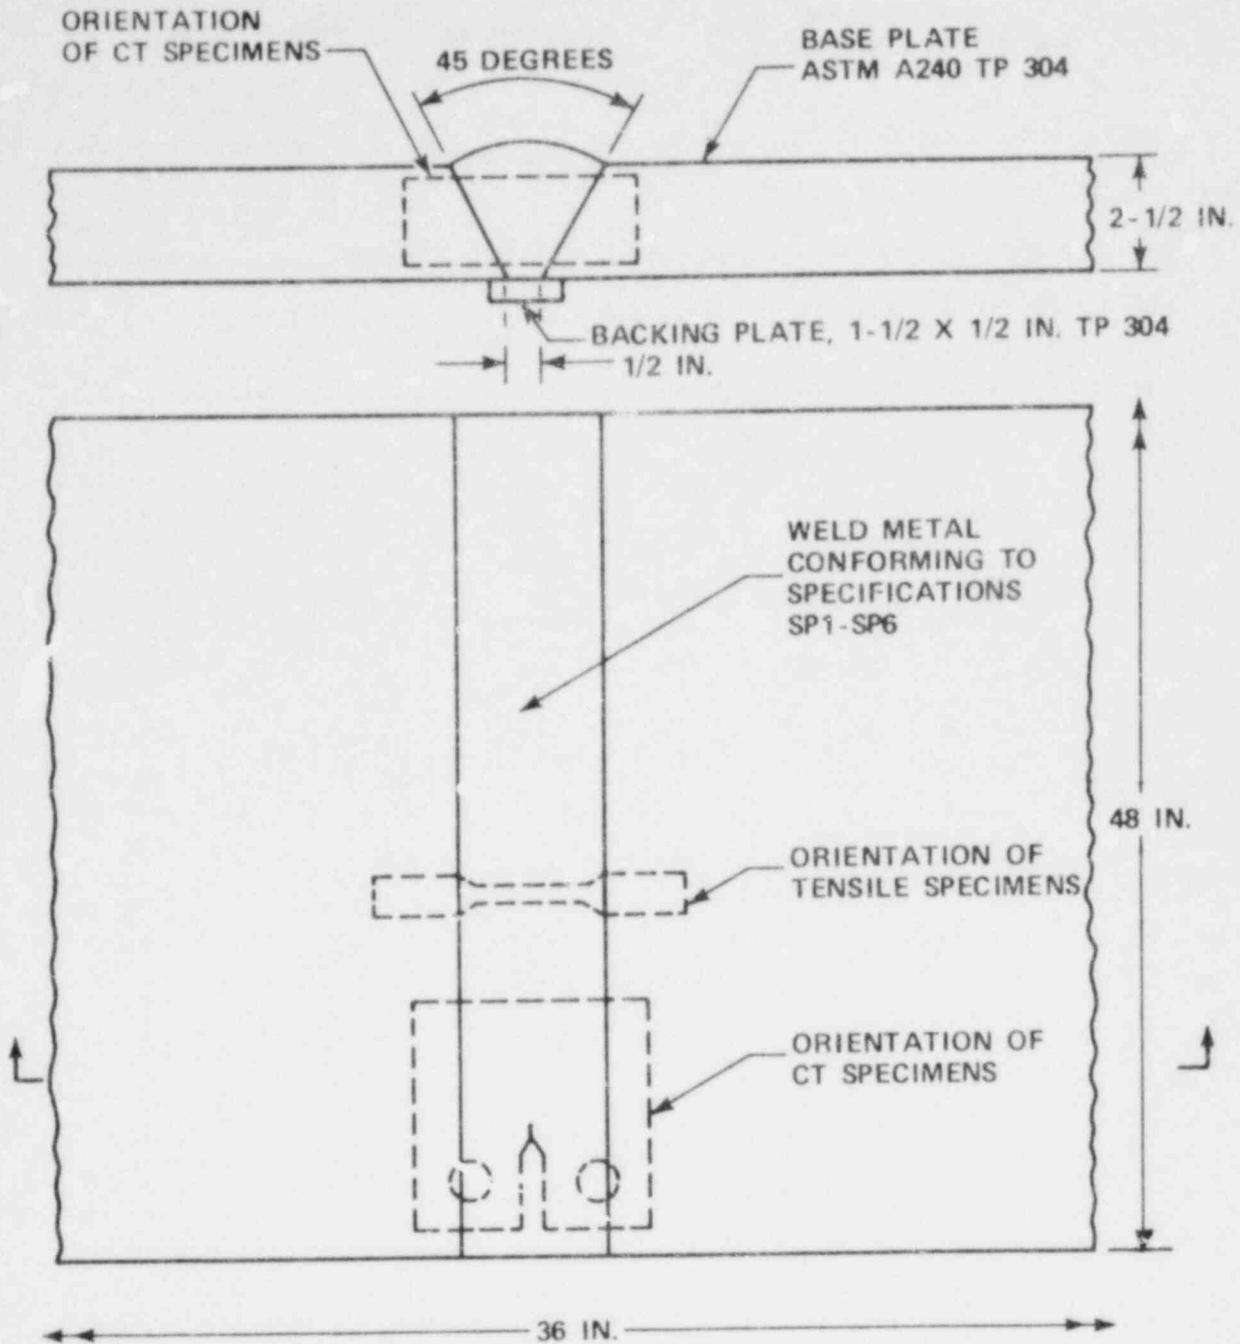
Weldment Configuration Showing the Orientation of Specimens
